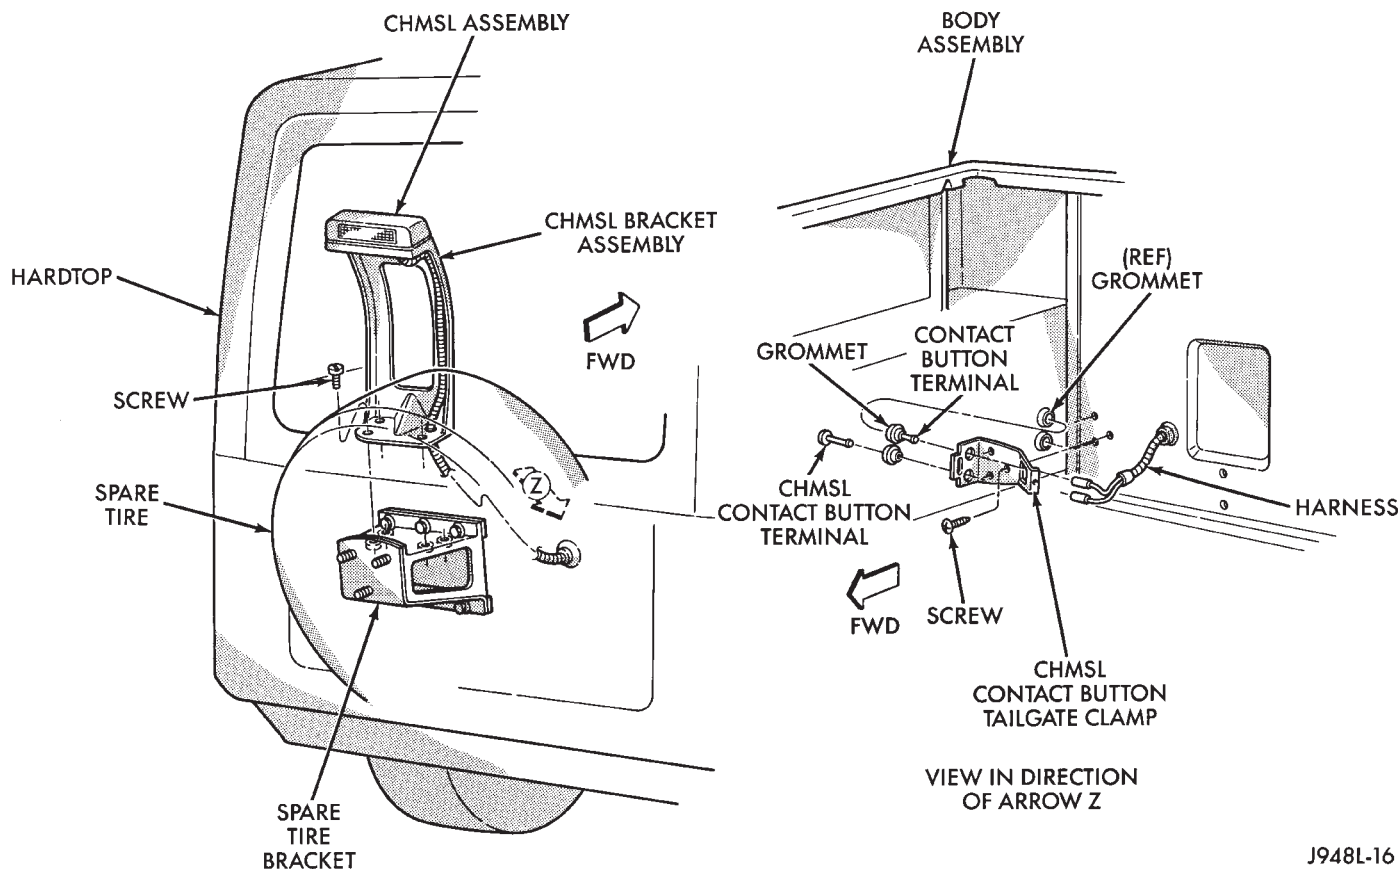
Center High Mounted Stop Lamp (CHMSL) Bracket Assembly
